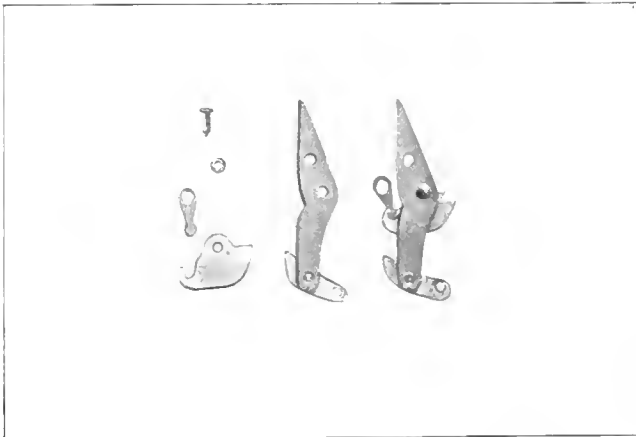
Cutting Jaw with Cam, Blade and Link in Place
